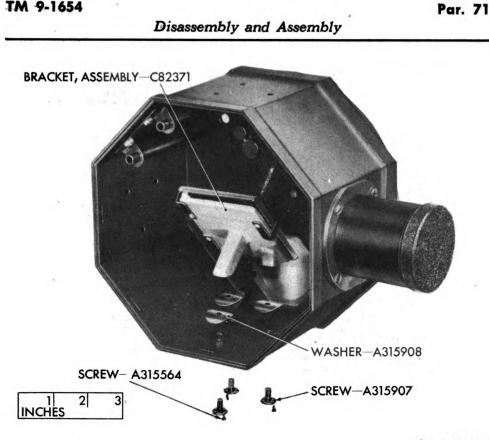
Lower Mirror Bracket Assembly Exploded From Target Housing Assembly of Trainer M6
